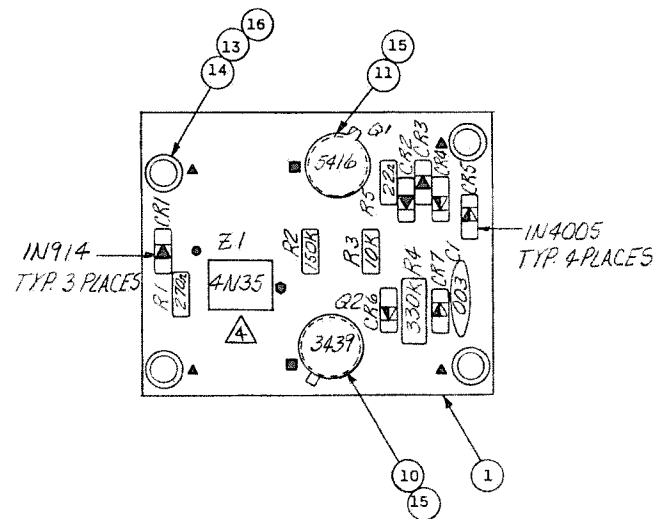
Optically Isolated High Level Neutral Keyer Assembly Drawing C3240D
